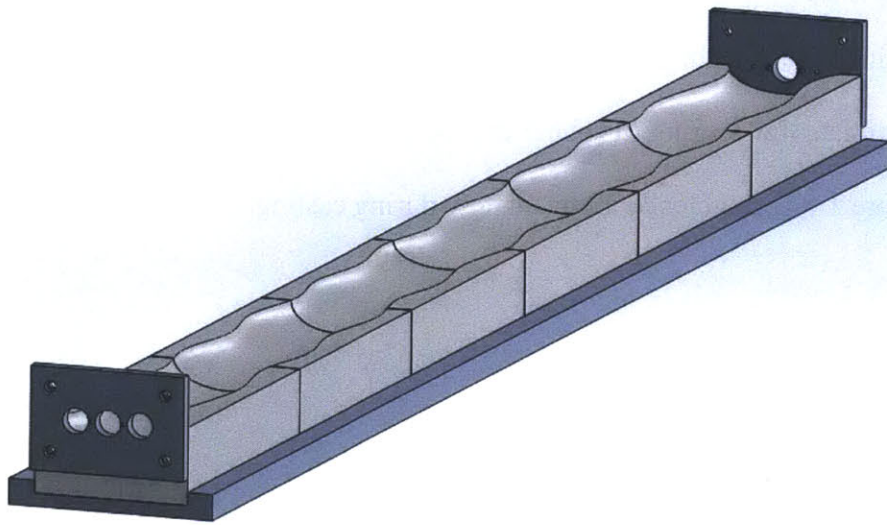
Solidworks image showing how the mold, jig, and end brackets connect
